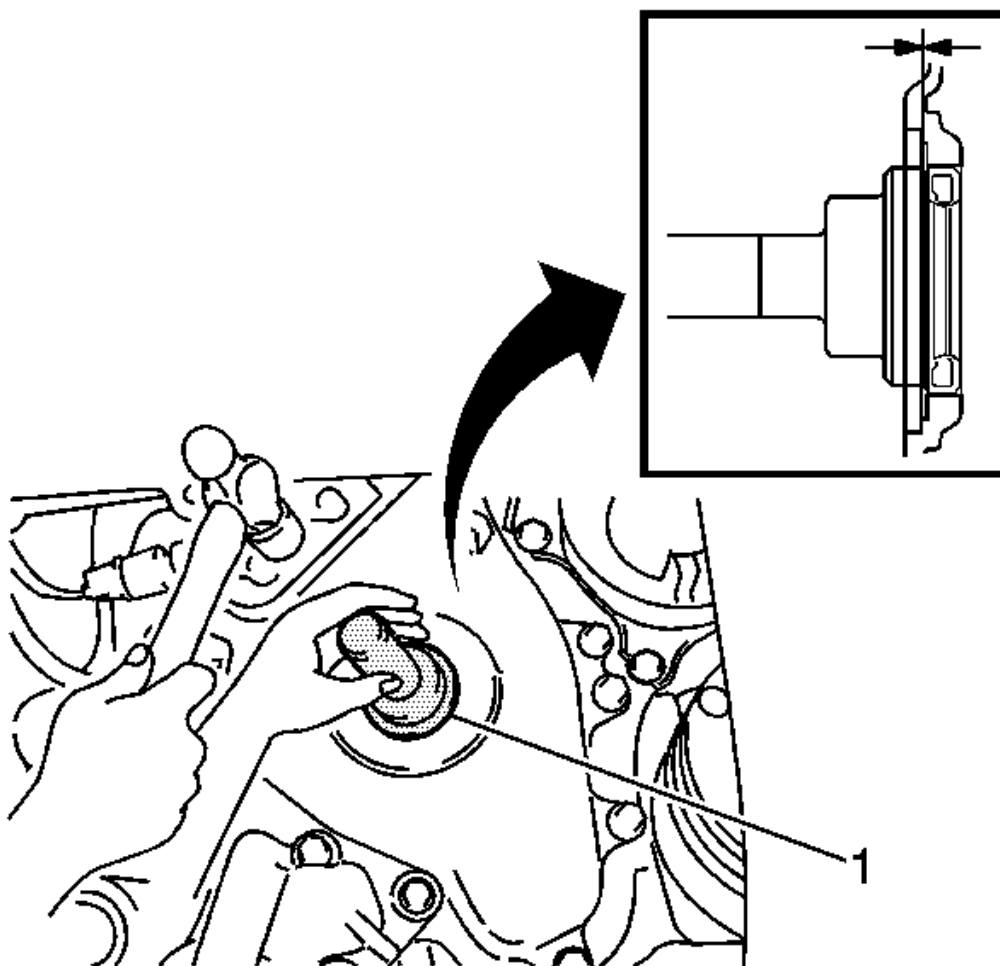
View Of Crankshaft Front Oil Seal Installation
